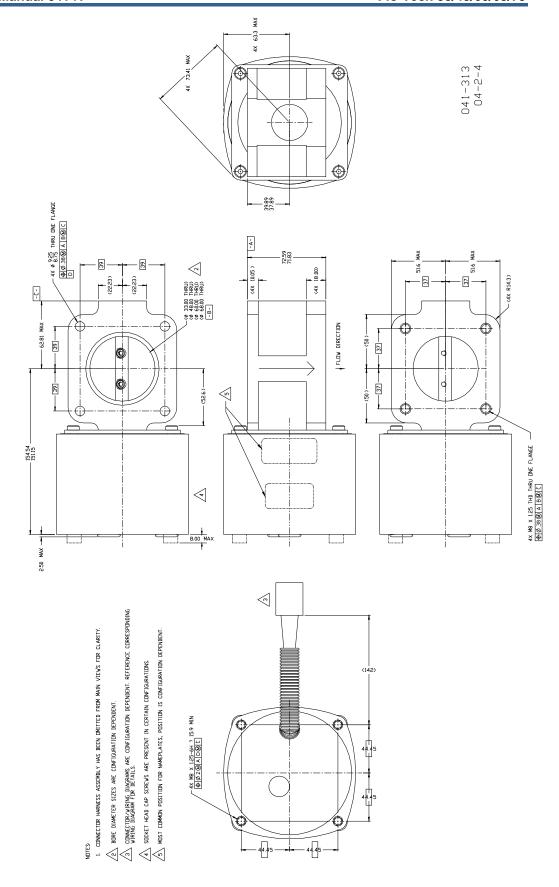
Flo-Tech Outline Drawing (Thick Flange Mounting)
